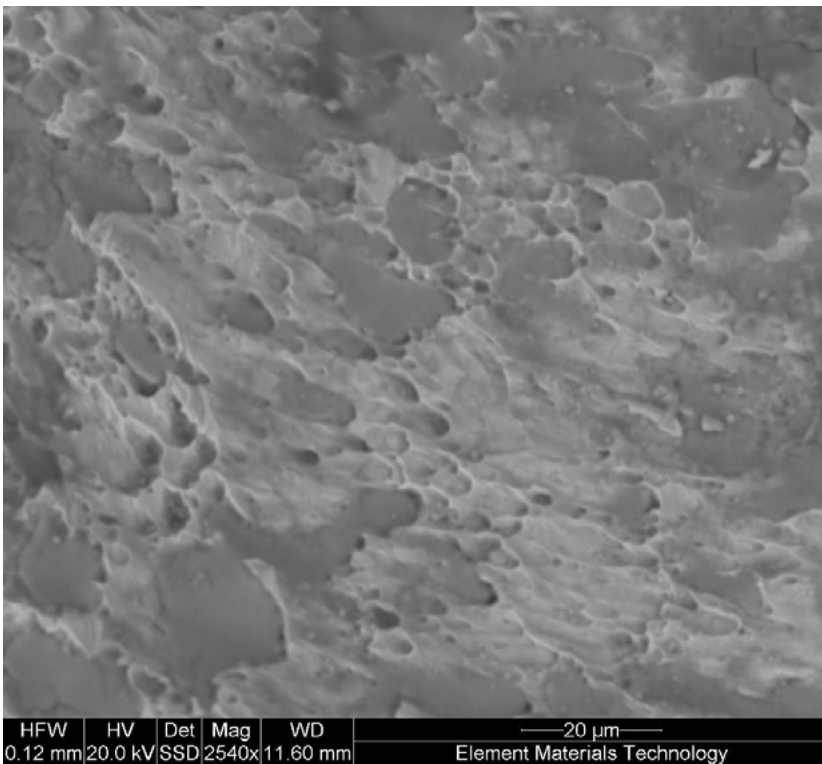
External bellow plate width section: dimple morphology indicative of ductile fracture
